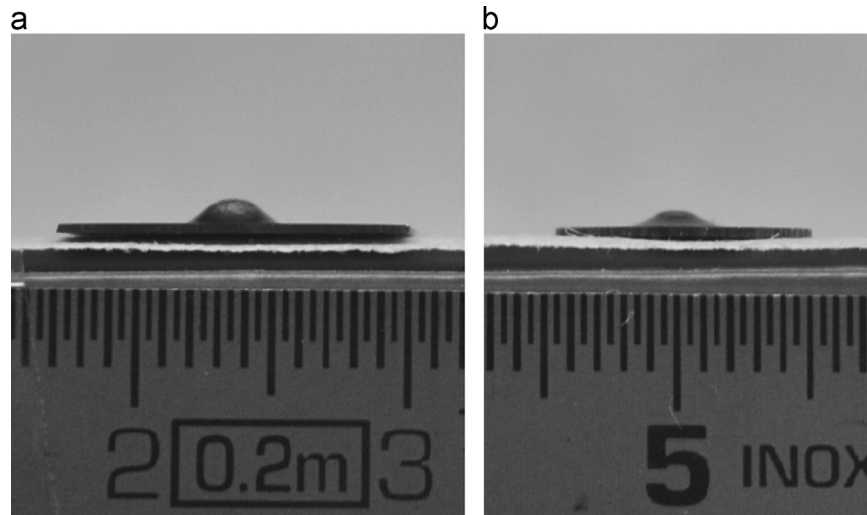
Appearance of specimens after small punch testing of CP Ti: (a) as-received T-specimen and (b) hydrostatically extruded T-specimen.
